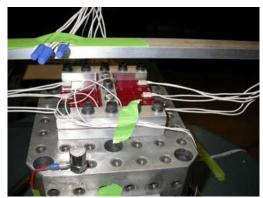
Vibration & Mechanical Shock Mounting Fixture
